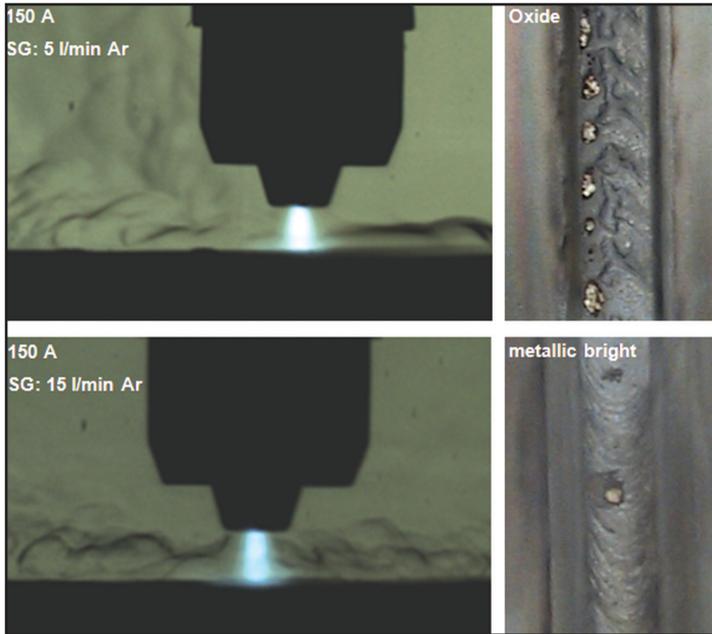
Schlieren images of plasma arc welding (S235, 6 mm; welding speed, 20 cm/min; PG-flow, 3 L/min; plasma gas three-hole-nozzle, 3 mm; torch distance, 5 mm; shielding gas flow 5 L/min (top); 15 L/min (bottom).
